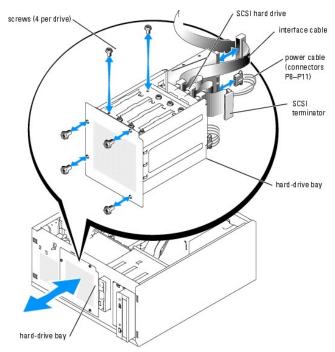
Installing or Removing a Cabled SCSI Hard Drive
